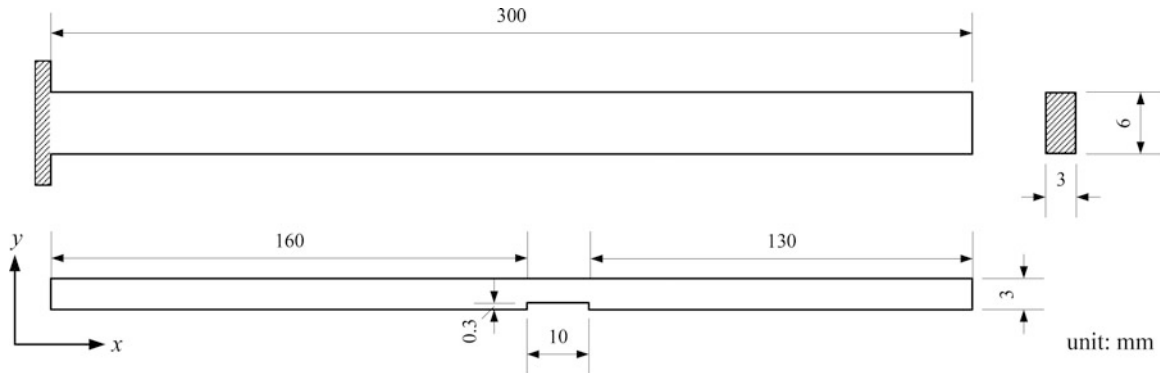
Dimensions of the pristine beam and damaged beam, and the location of the damage on the damaged beam
